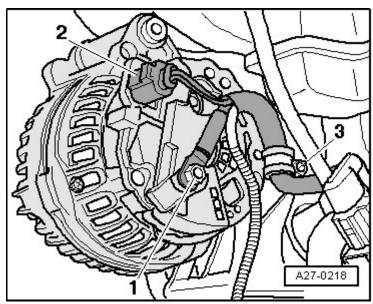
Identifying Connector, Electrical Wire And Wiring Clamp On Generator Courtesy of AUDI OF AMERICA, LLC
